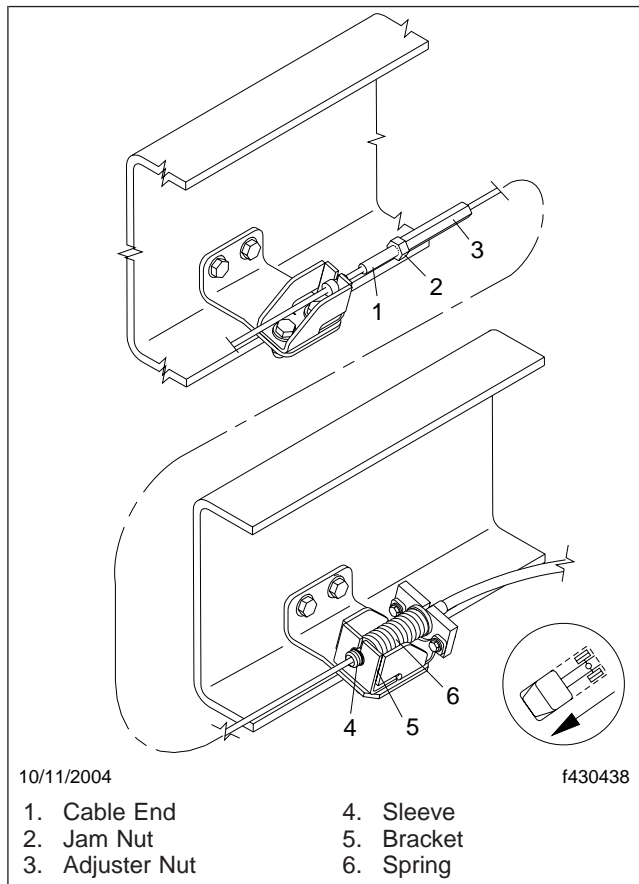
, Cable Adjustment, Foot-Pedal-Actuated Parking Brake
